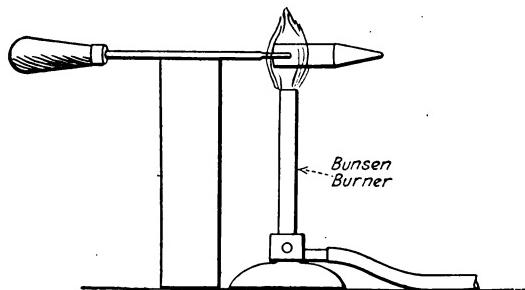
How a soldering copper is heated with a Bunsen burner
